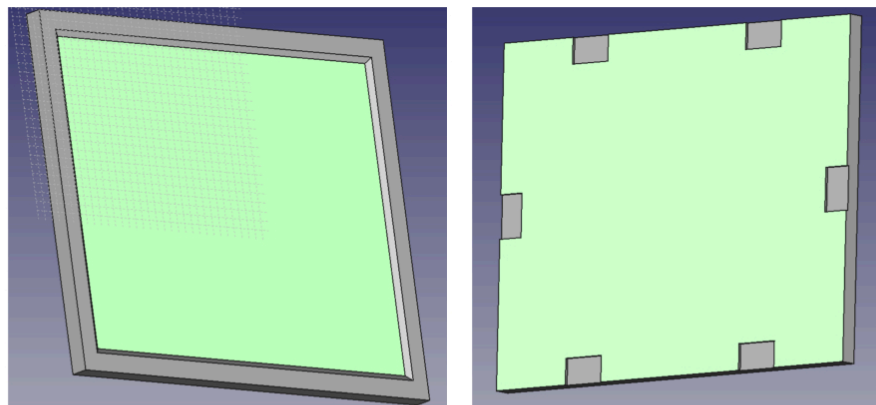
The left figure shows the bottom aluminum plate onto which hot wax is poured, and the right figure shows the top aluminum plate which is used to compress the wax, with six cut-outs to let excess wax exit the mold. Three bottom plates are needed to produce three different bolus thicknesses (3 mm, 5 mm, and 1 cm).
